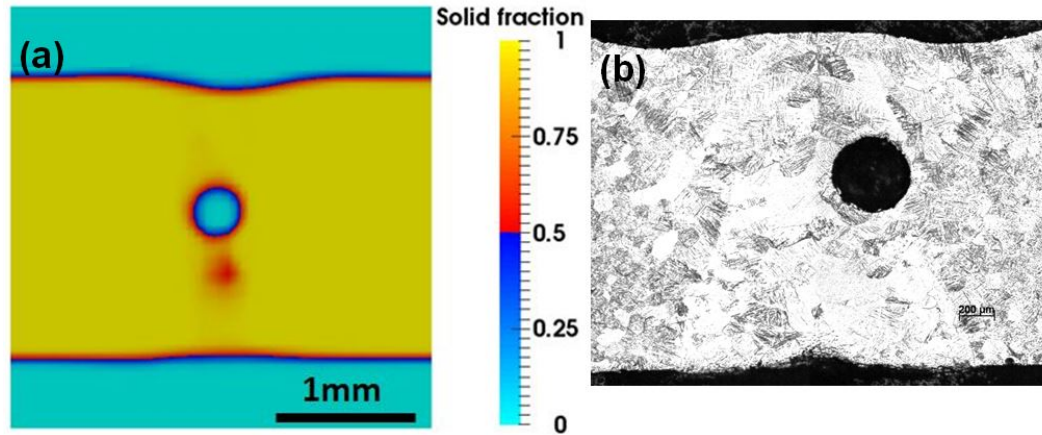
Porosity prediction from (a) the keyhole model using welding condition of 2mm weld thickness, 25 mm/s weld speed and 4000 W laser power, compared with (b) available experimental data of laser weld using the same condition (Panwisawas et al., 2017).
